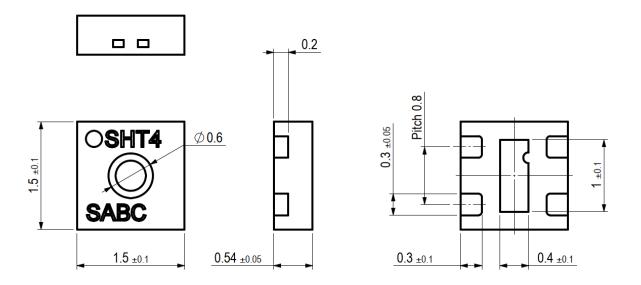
Dimensional drawing of SHT4x including package tolerances (units mm).
